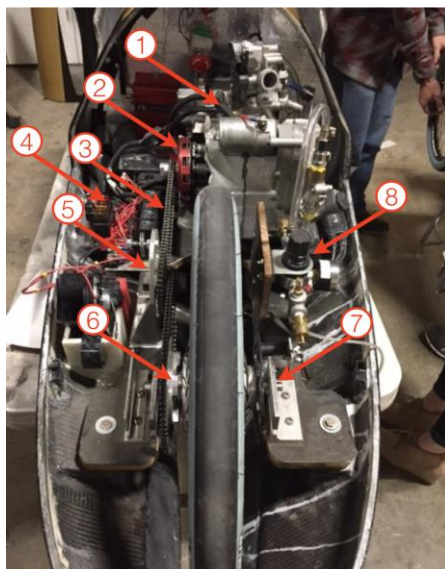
Shown here is the modular engine plate with all drivetrain and ECU components installed. The entire assembly can be removed together in order to service the chassis or test the system independently of the rest of the car. The parts pictured include; 1) Engine, 2) Vortex Clutch, 3) #25 Chain, 4) Electronics, 5) Jackshaft, 6) Rear Hub and Freewheel, 7) Rear Axle Dropout, 8) Fuel System
